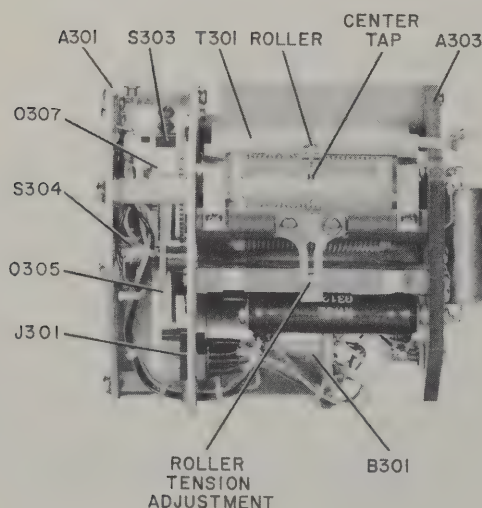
R-F Autotransformer Subassembly, Alignment Points
